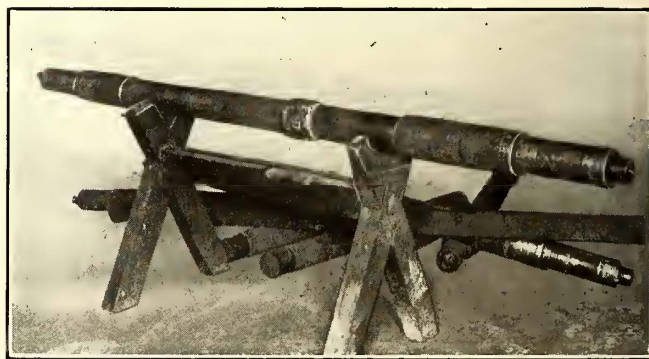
AXLE WELDED AND READY TO BE TURNED TO SHAPE
